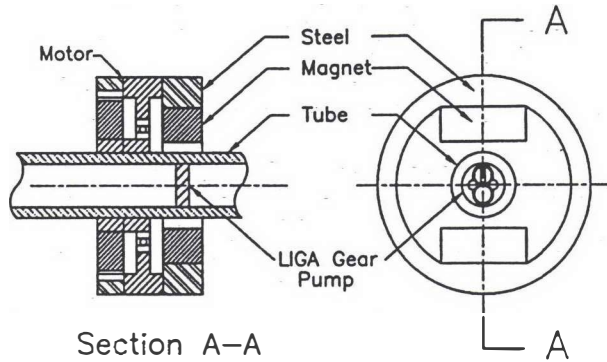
Plan view and cross sectional view of the LIGA gear pump with magnetic coupling structure of in-line gear pump. The tubing containing the micromechanical gear pump is clamped in a bearing which supports the rotating magnetic coupling.
